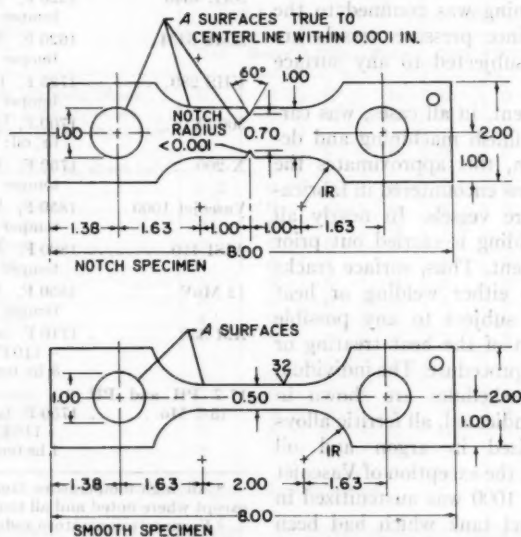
Smooth and Sharp Edge Notch Sheet Tensile Specimens.
